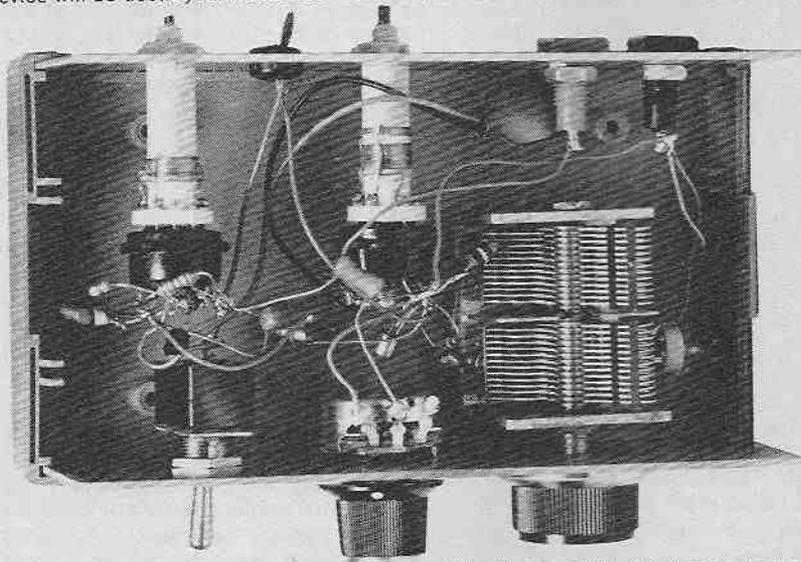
Complete wiring details for the converter. Most of the components are mounted on the coils directly. When soldering TR1 be sure to leave the shorting clip in place, otherwise the device will be destroyed. Remember however, to remove it before switching on!
